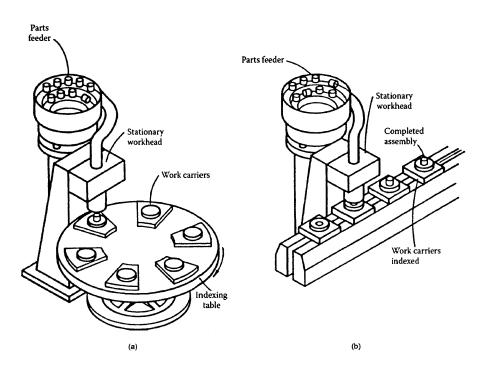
Examples of indexing carrier mechanisms shown with an arbitrary parts feeder (a) an intermittent, rotary transfer system, where the assemblies are removed manually when completed (b) an intermittent, in-line transfer system where the assemblies are removed and the pallets reset manually [22]
